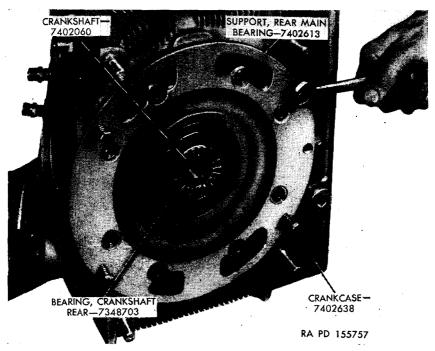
Withdrawing crankshaft and rear main bearing support from crankcase.
